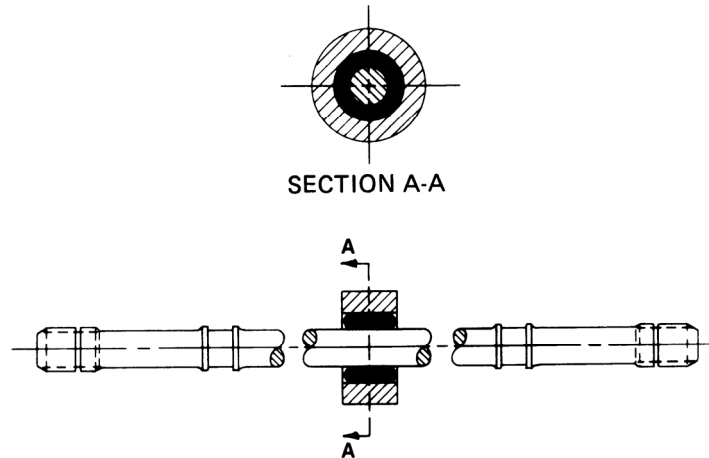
AXLE SHAFT MOUNTED TORSIONAL DAMPER
